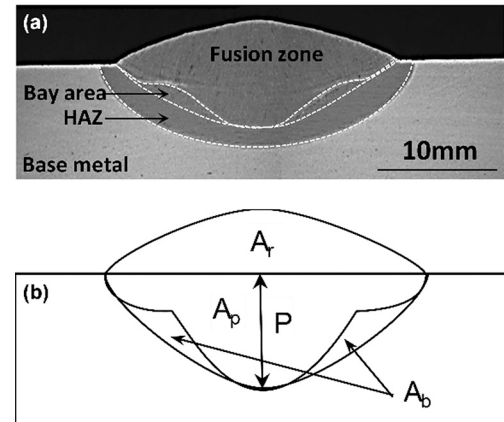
(a) Macrograph showing weld cross-section produced by AC square waveform, and (b) schematic representation of the weld bead characteristics.
